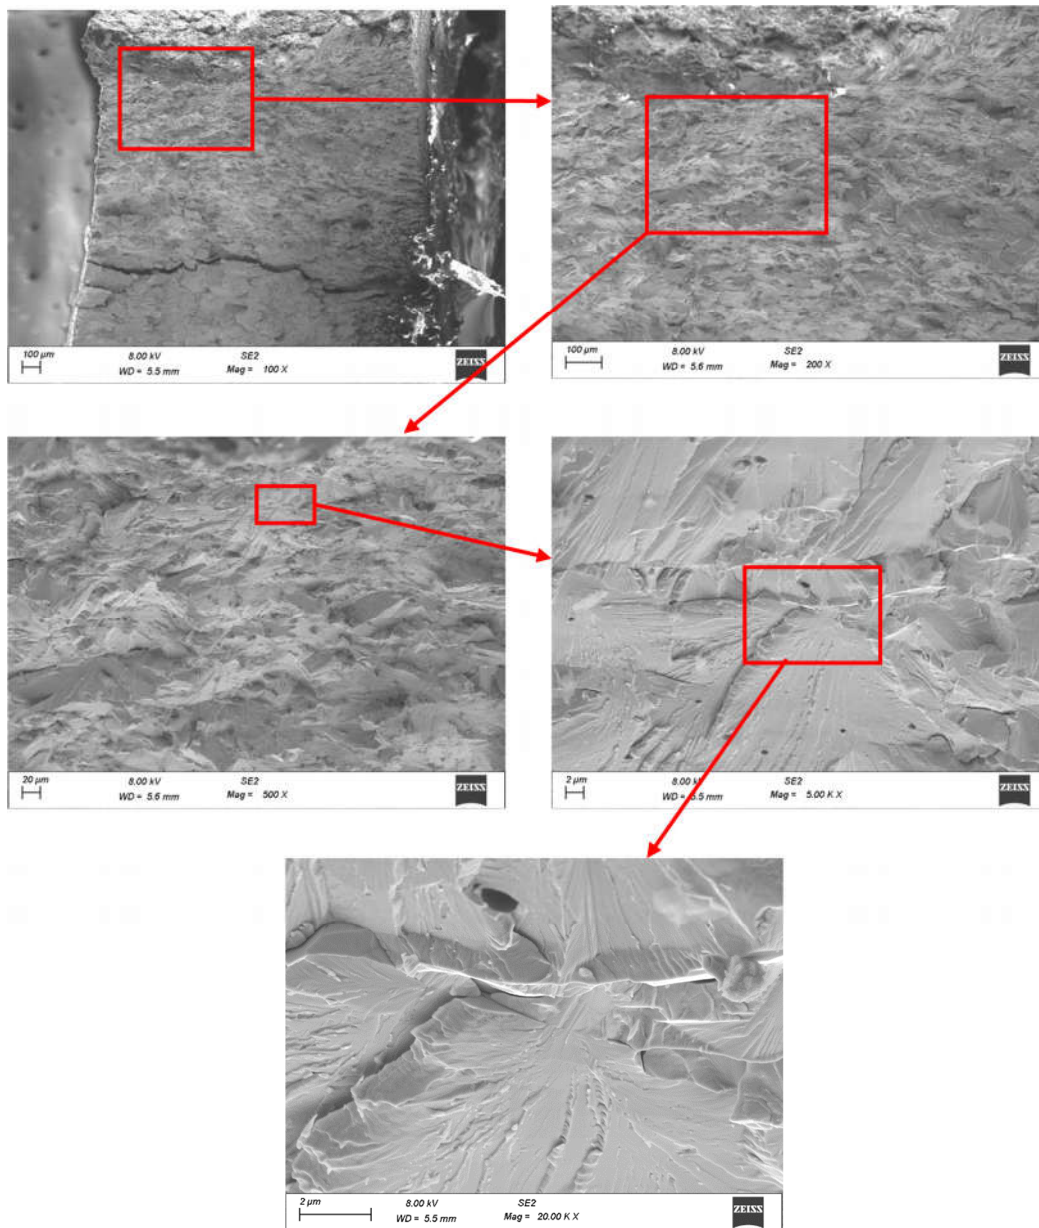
Fracture surface of sample 2 L (1). Direction T horizontal. Mainly distorted cleavage facets, small intergranular fracture surface fraction. Submicrometric pores.
